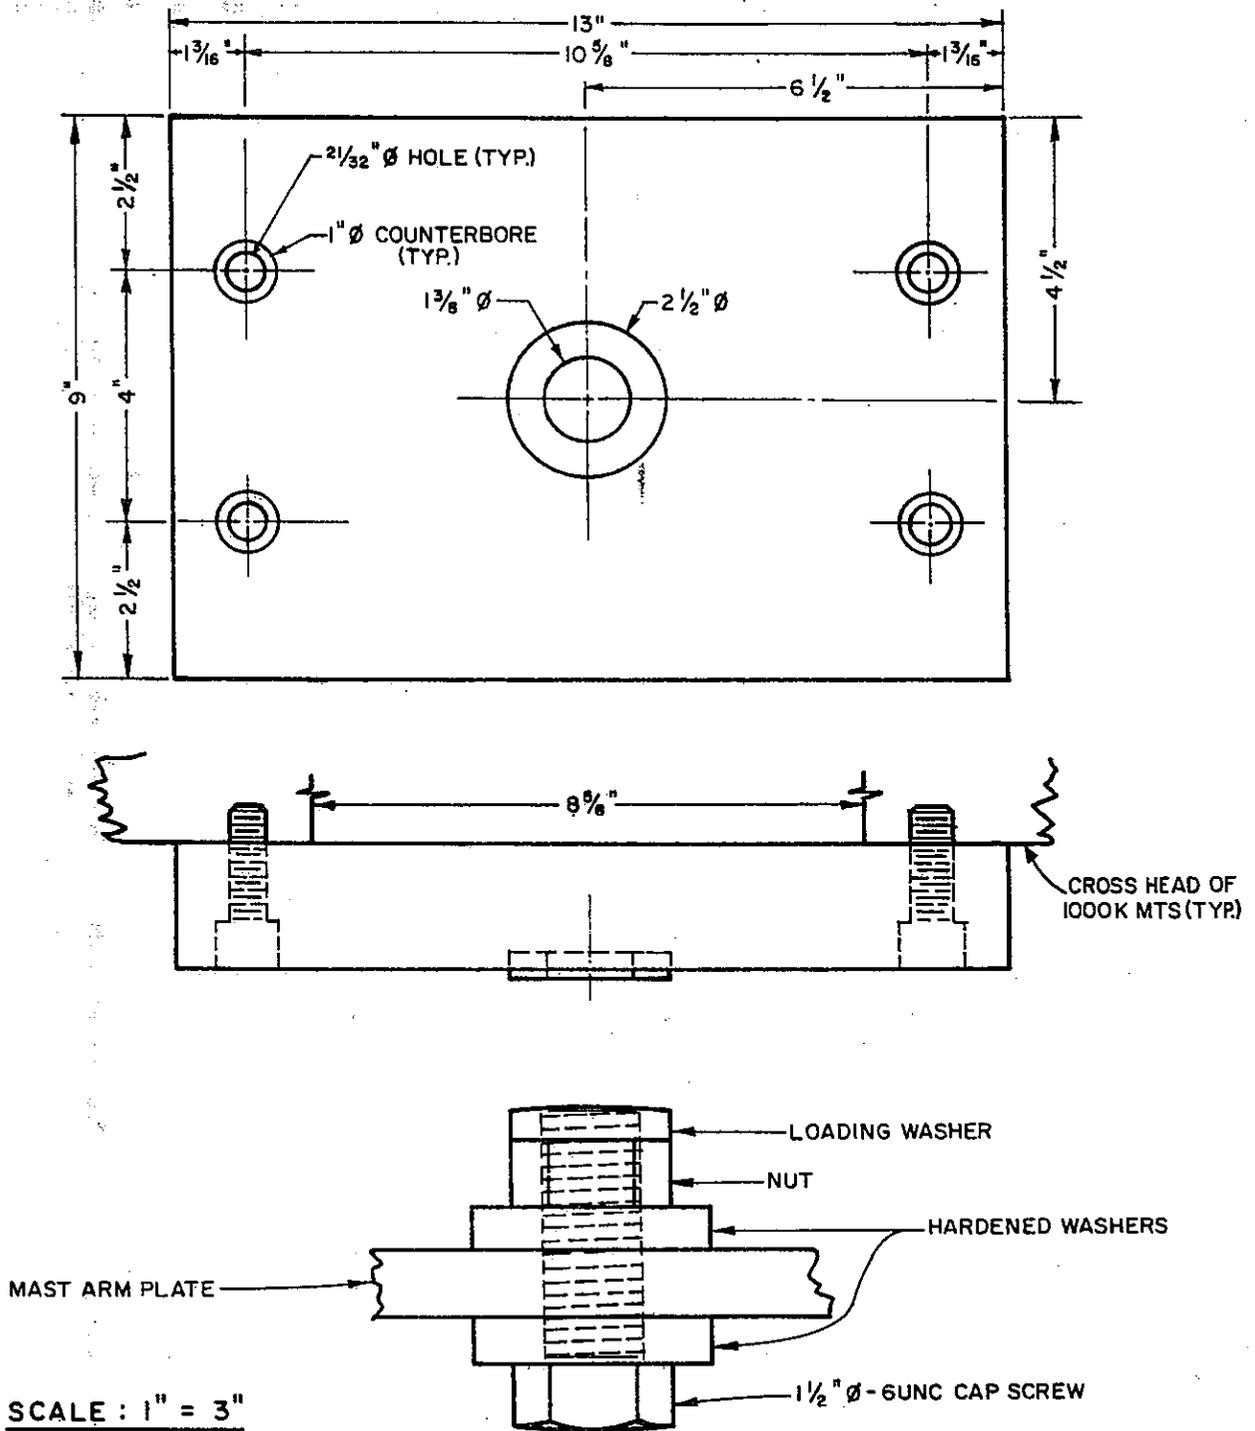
Loading head fixture with curved washer for testing 1" \varnothing ASTM A325 hot-dip galvanized cap screws.
